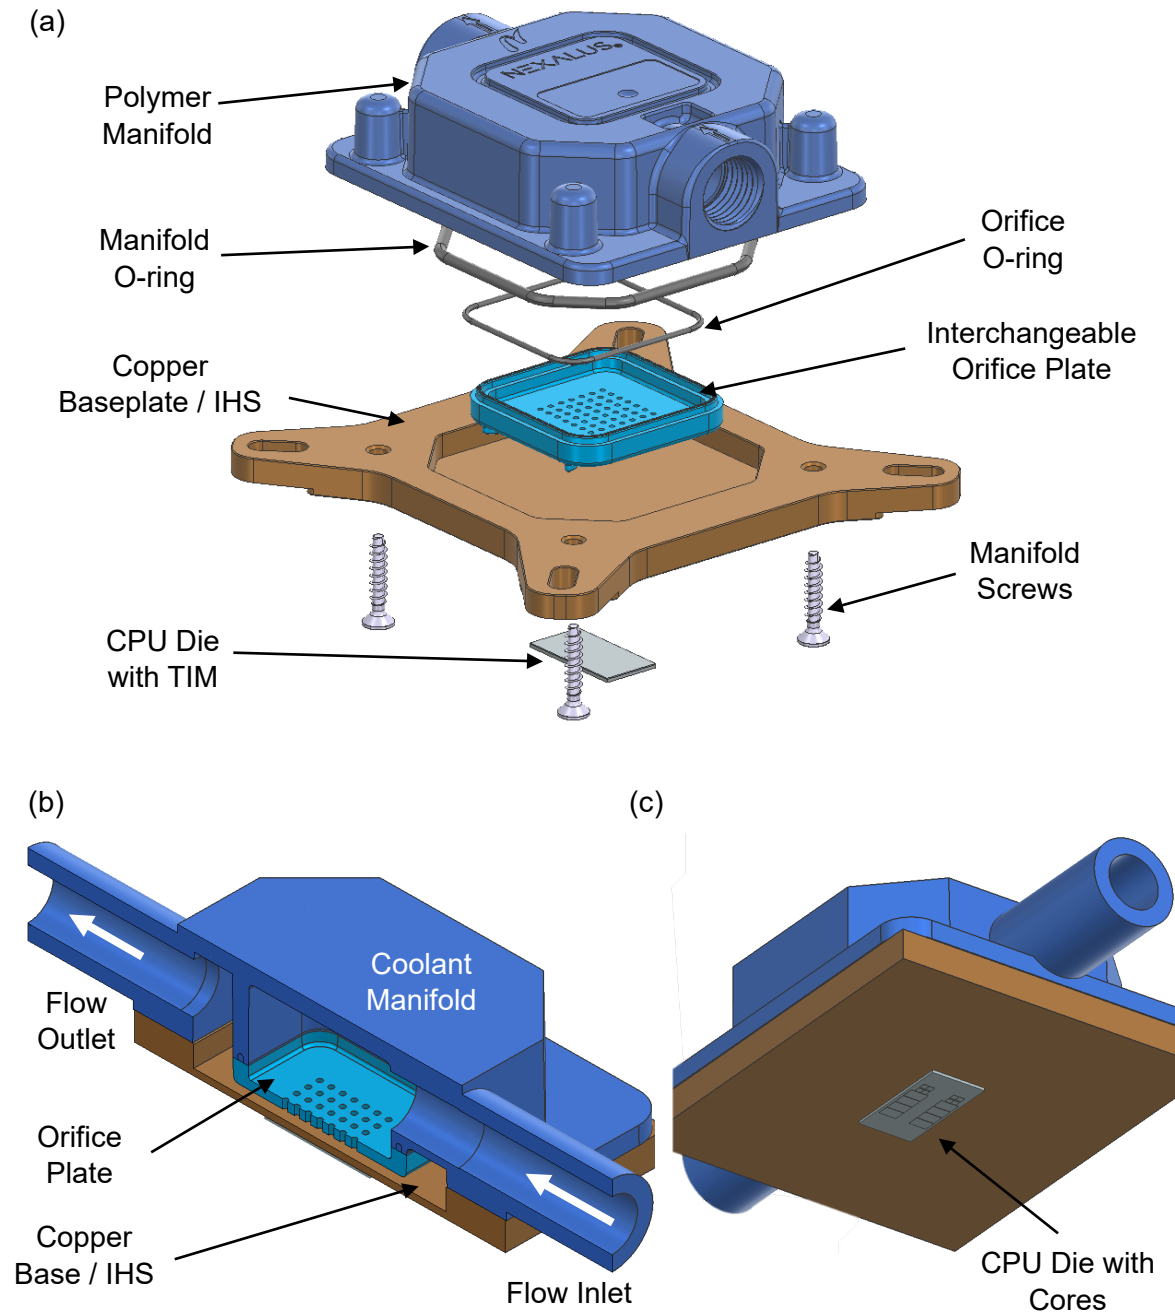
(a) Exploded view of physical coldplate assembly, (b) sectioned CAD assembly of coldplate heat exchanger and CPU die, and (c) underside of heat exchanger showing attached CPU die and core placements.
